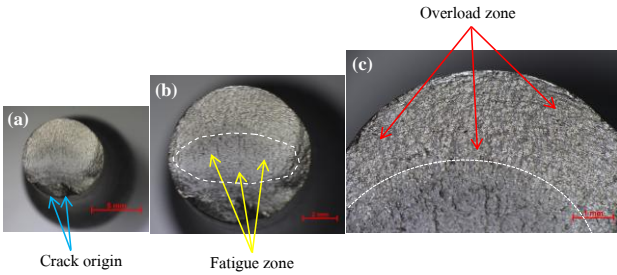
Fracture characteristics photographs of specimens with Zoom Stereo Microscope.
